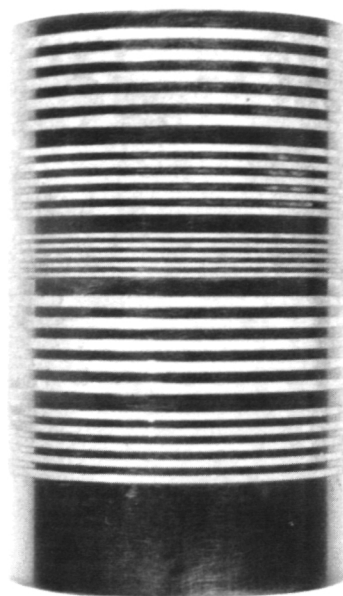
Groove Geometry of Machined Fluidized Bed Test Cylinder
